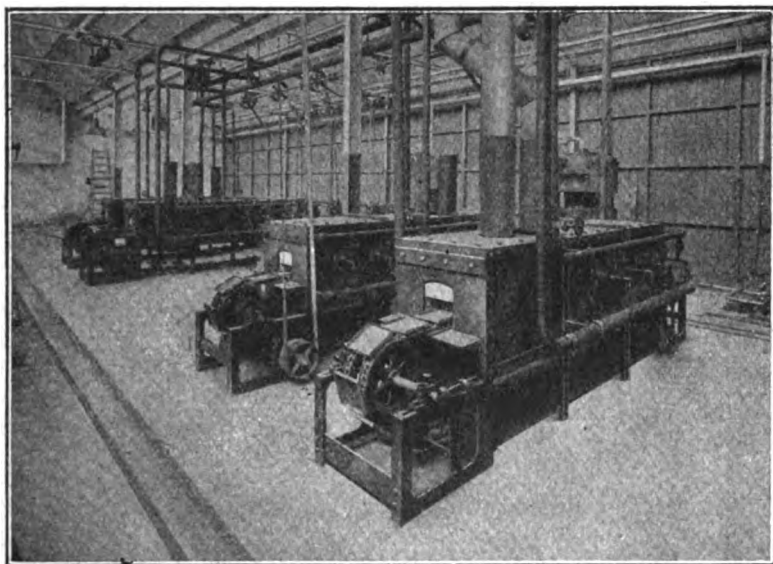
FOUR BELT-DRIVEN CONVEYOR FURNACES FOR HEATING BRASS BILLETS.
